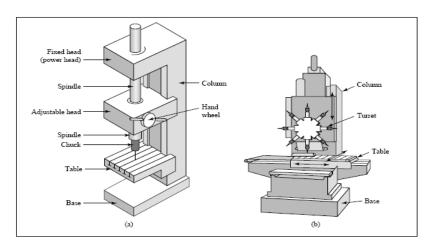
Schematic illustration of (a) vertical drill press, (b) CNC turret drilling machine.
